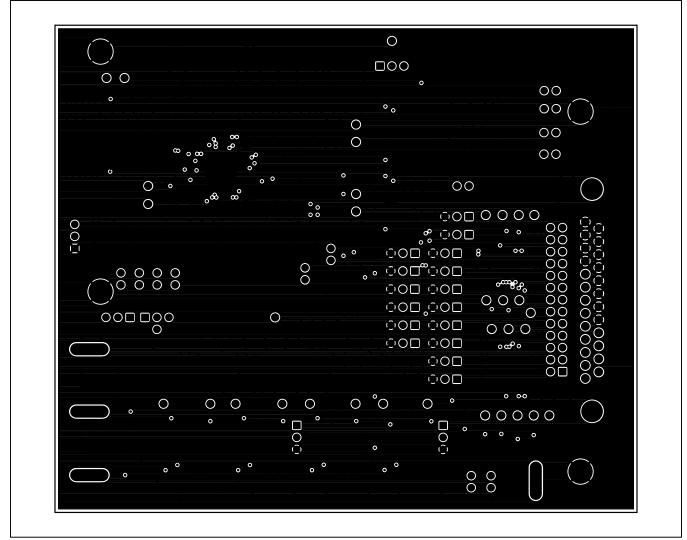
MAX2839 EV Kit PCB Layout—Inner Layer 2, Ground Layer
